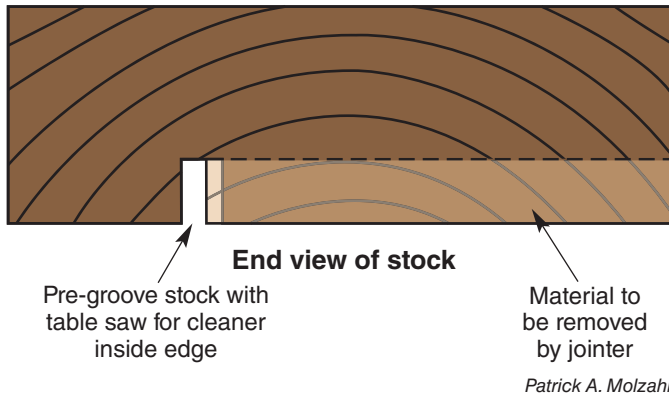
Pre-grooving stock on the table saw will result in cleaner rabbets. Depending on the style of cutterhead, pre-grooving may be required in order to rabbet.
